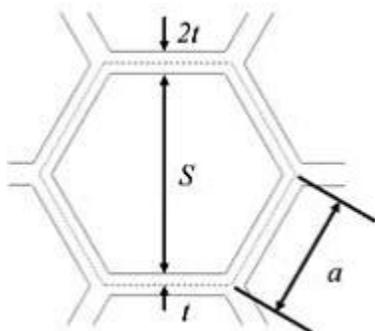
Honeycomb Heat Sink Model Cell Dimension [1]
